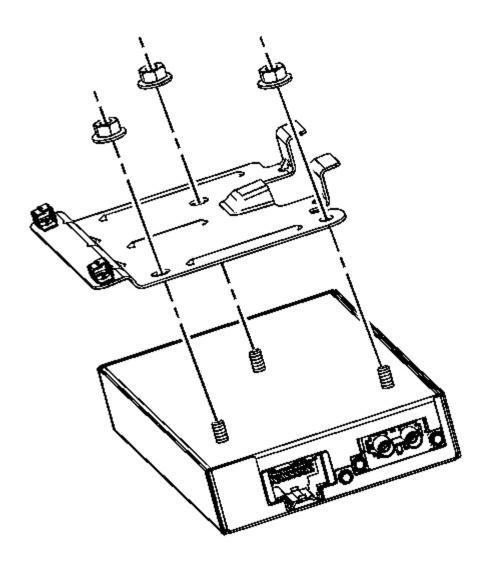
View Of Receiver & Mounting Bracket Courtesy of GENERAL MOTORS CORP.
